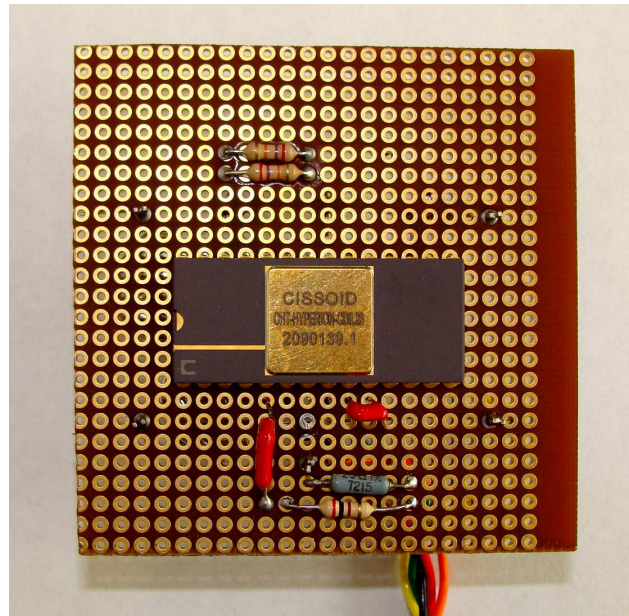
CHT-HYPERION half-bridge driver and passive parts mounted on test board.
